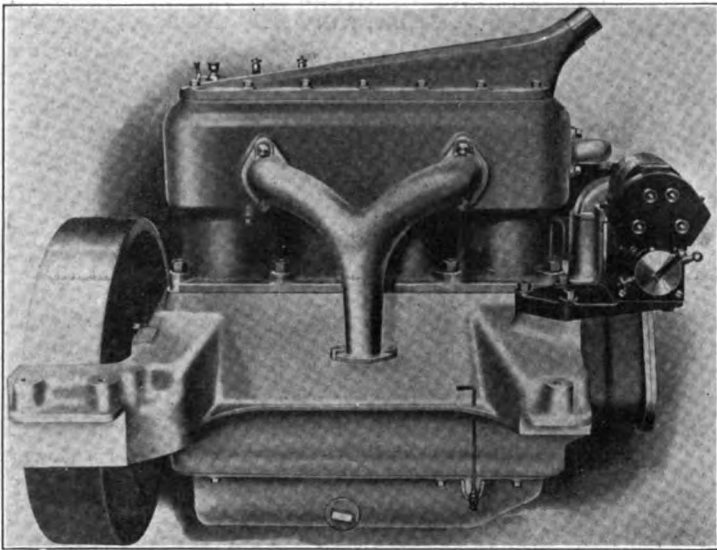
HUDSON BLOCK CYLINDER CASTING
